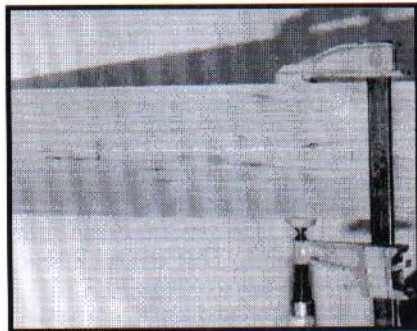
The clamped joint should have a bit less glue squeeze-out than this
